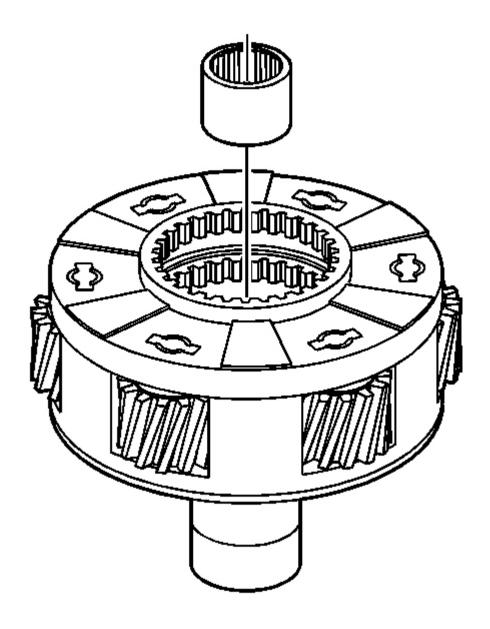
Inspecting Mainshaft Front Support Bearing Courtesy of GENERAL MOTORS CORP.
